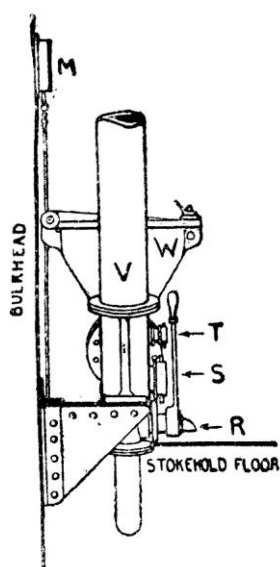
Stokehold Fan Controller, with Cover removed.
